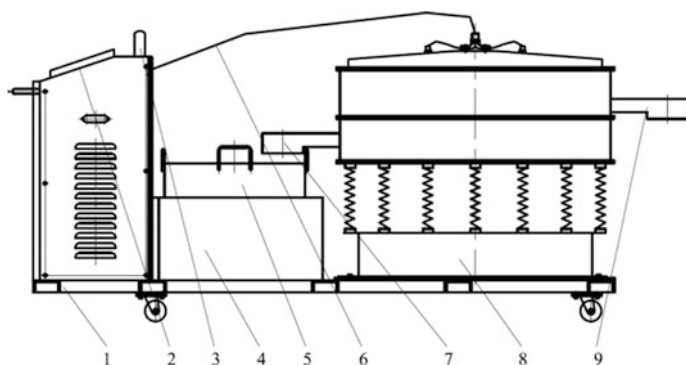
Overall diagram of abrasive blocks rinsing device. 1—Frame body; 2—control panel; 3—alarm lamp; 4—main water tank; 5—filter box; 6—pipeline; 7—water outlet; 8—vibrating screen; 9—discharge outlet
